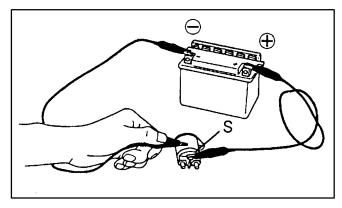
STARTER MOTOR TEST, GH280 ENGINE
